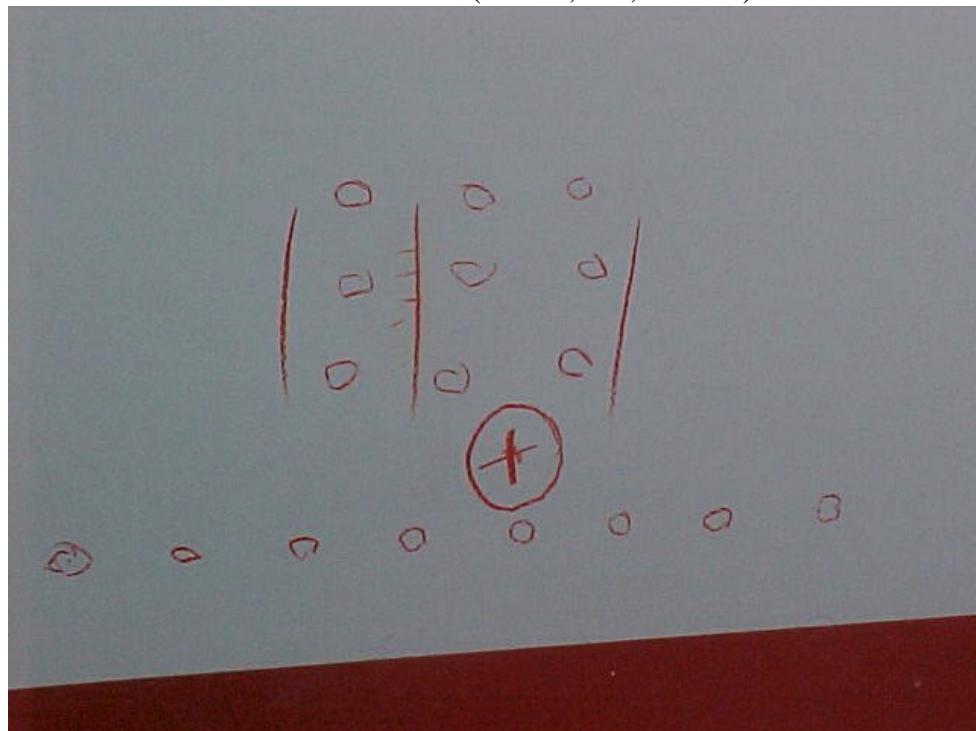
Representative example of the indications found near stringers 10L and 4L during the tear strap debond inspection. Top row of stringer 10L (lap joint) is shown along with 3 x 3 rivet pattern from the tear strap. This indication is possibly a signal from the gap between the skin and tab below the tear strap end instead of a debond (See Figures 24-26).
